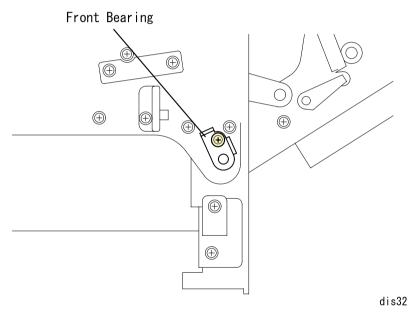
Front Bearing for the MP Tray Paper Load Unit
